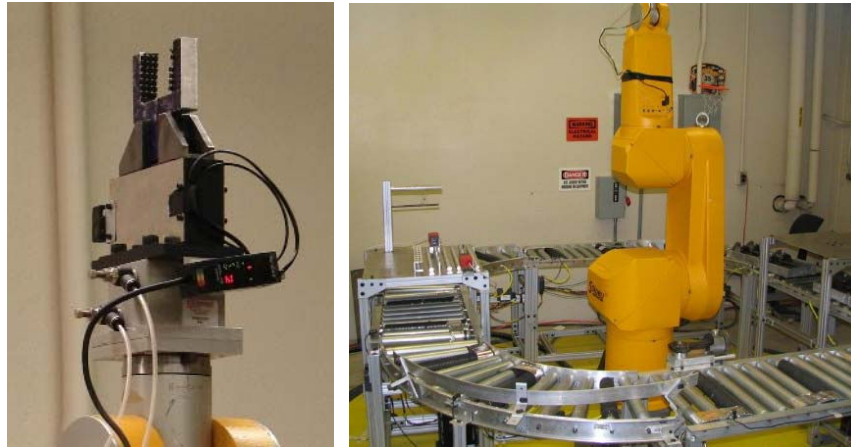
Staubli RX-130 industrial robot with (a) end effect gripper for part manipulations, and (b) conveyors in enclosed manufacturing cell
